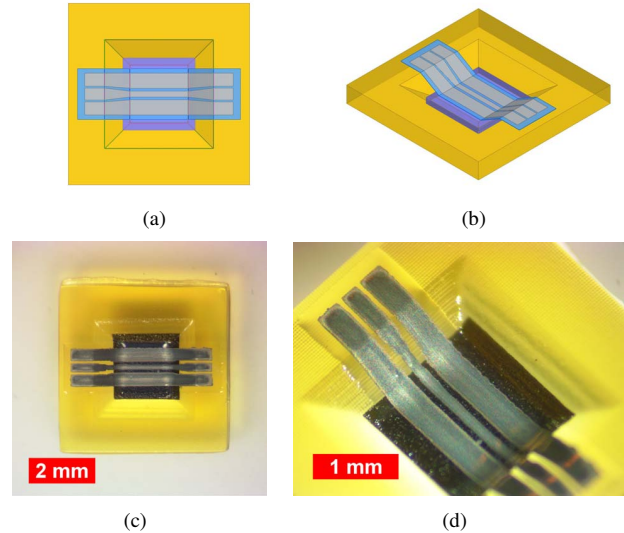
Fully-printed 3D TMV-integrated partial encapsulant with silicon die: 3D model (a) top and (b) perspective view, fabricated sample (c) top and (d) perspective views.
